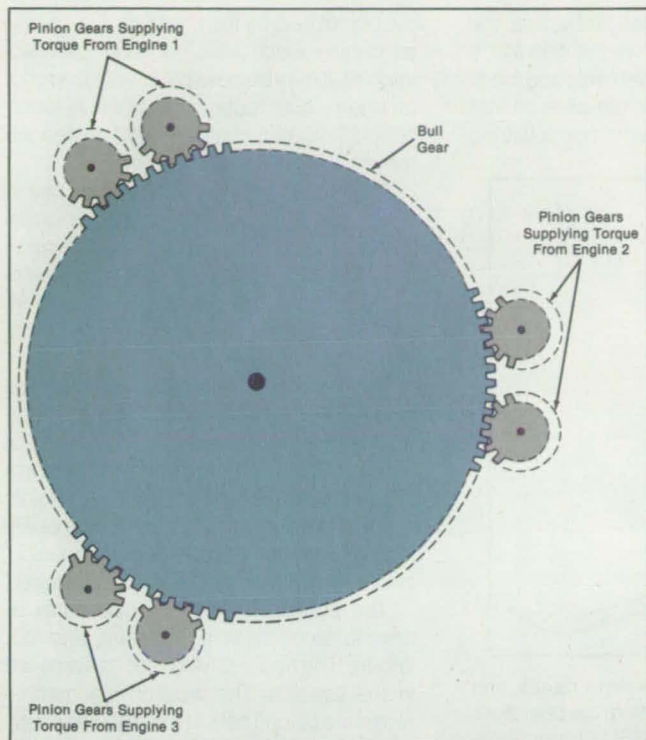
Three Pairs of Pinion Gears would supply torque to the bull gear. The pinion gears would also provide lateral support, eliminating the need for the bull-gear shaft and its bearing.
